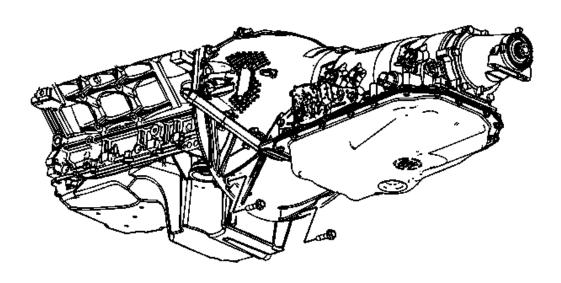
View Of Lower Transmission Bolts Courtesy of GENERAL MOTORS CORP.
